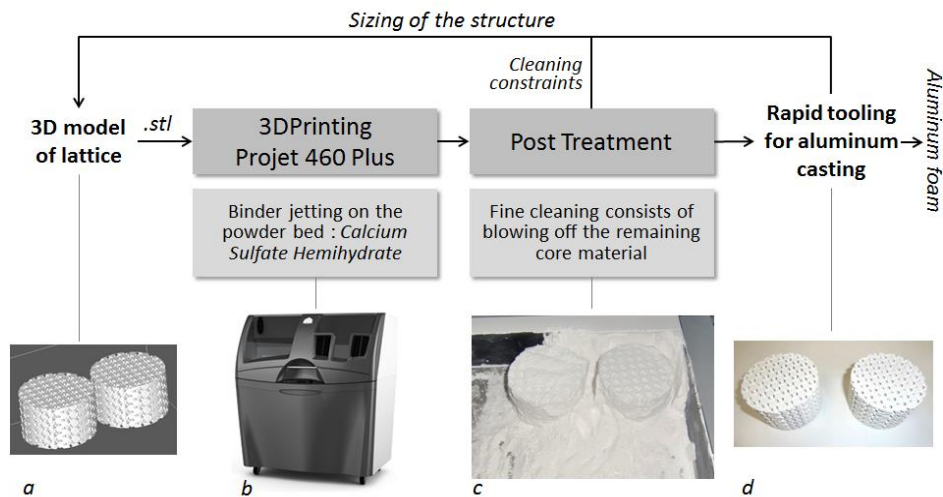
Manufacturing process of rapid tooling using 3D Printing: a. 3D model in stl format, b. 3D Printer Projet 460+, c. Parts into the powder, d. Final model (mold cavities)
